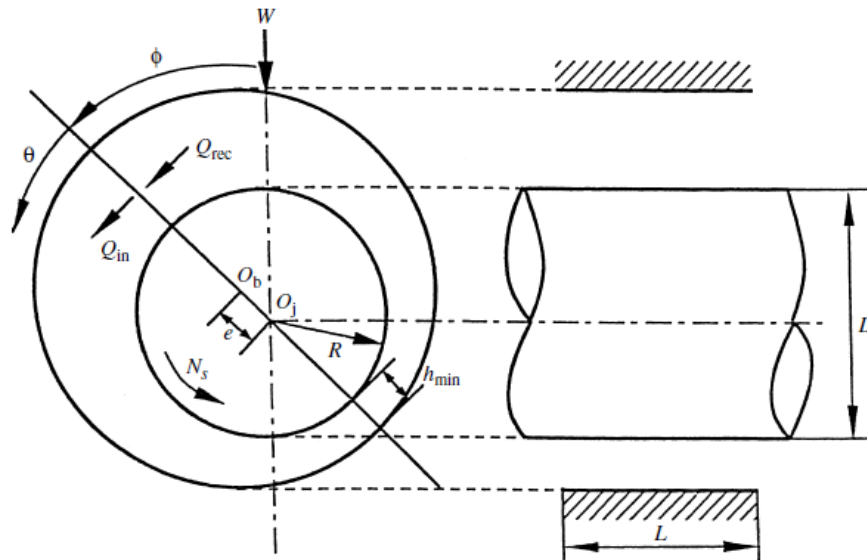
CROSS SECTION OF A JOURNAL BEARING [1]
